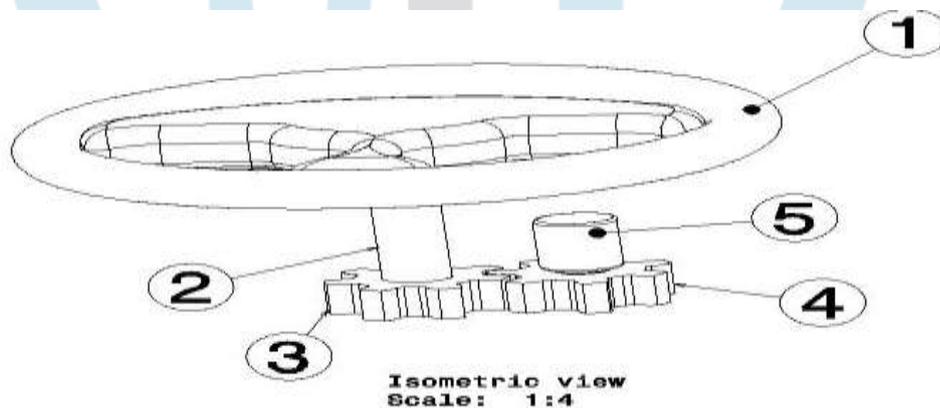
STEERING SYSTEM ASSEMBLY WITH ENCODER
